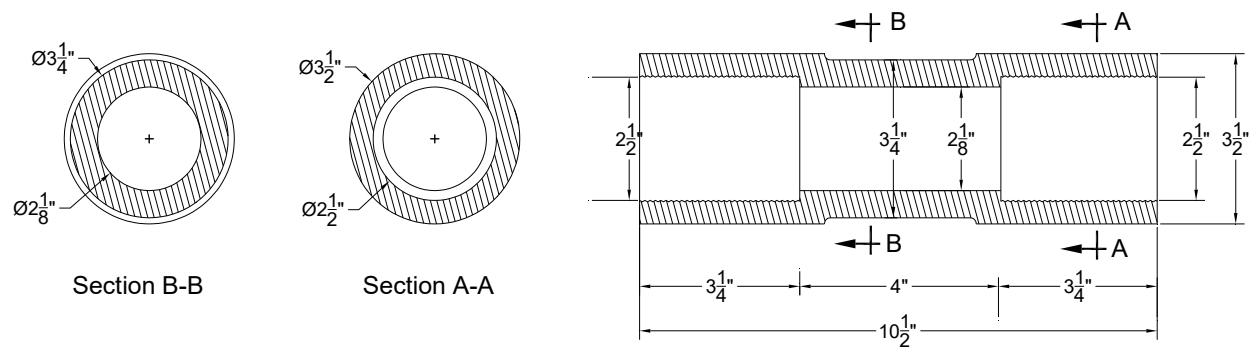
Longitudinal and cross sections of the fabricated vertical struts.
